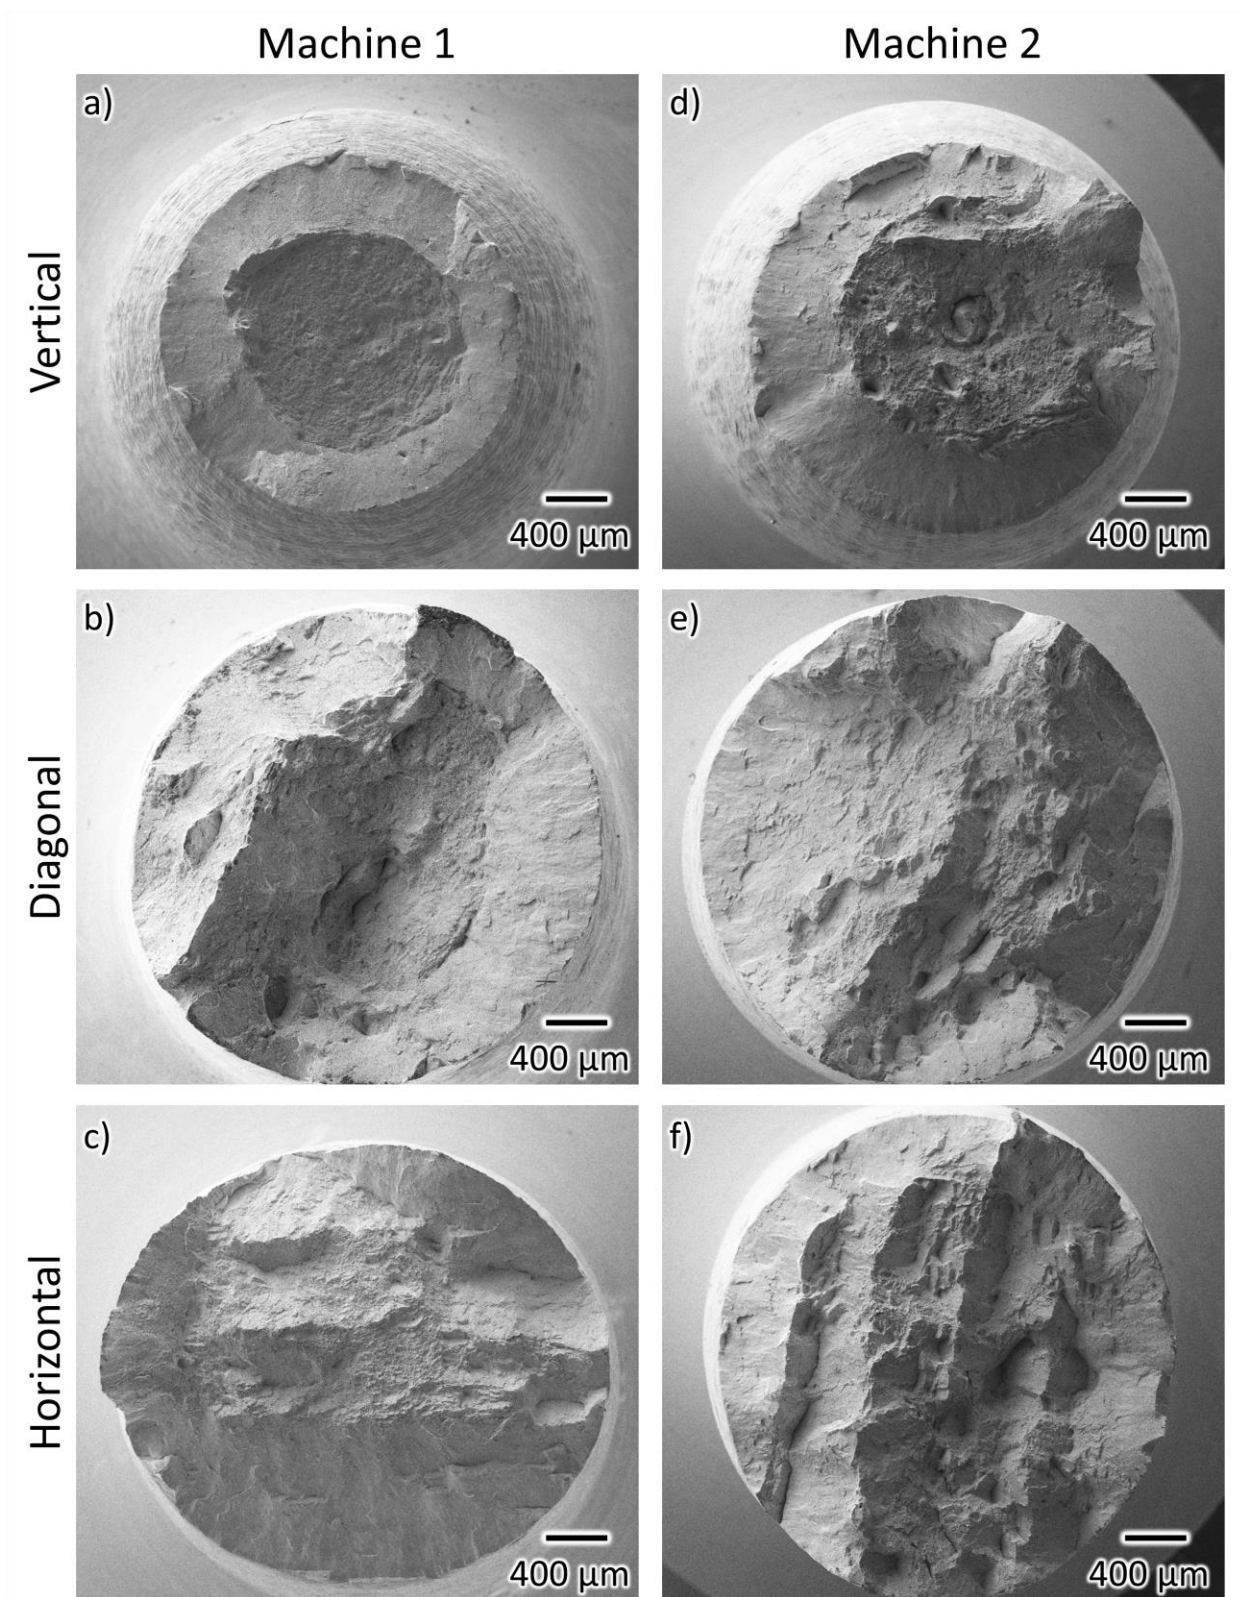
Fracture surfaces for different orientations in a) Machine 1 and b) Machine 2.
